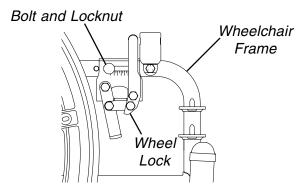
REMOVING EXISTING WHEEL LOCK
